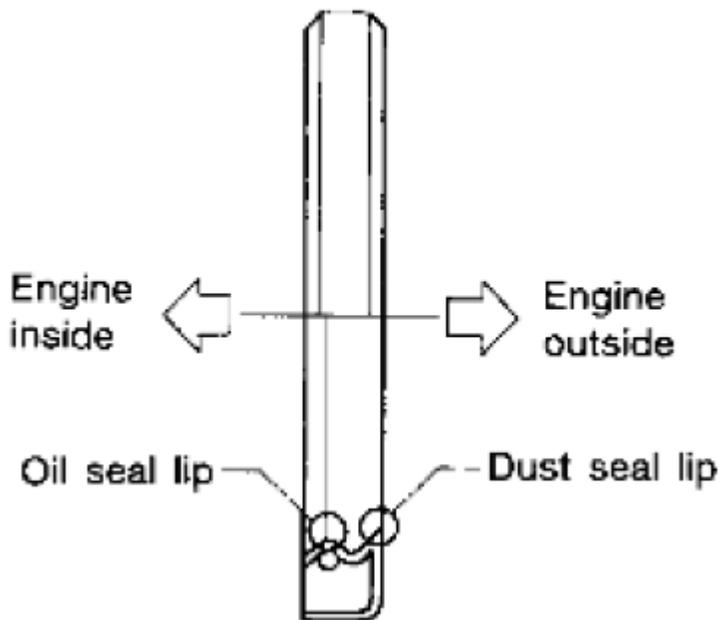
Identifying Oil Seal Lip And Dust Seal Lip Orientation For Installing Oil Seal
